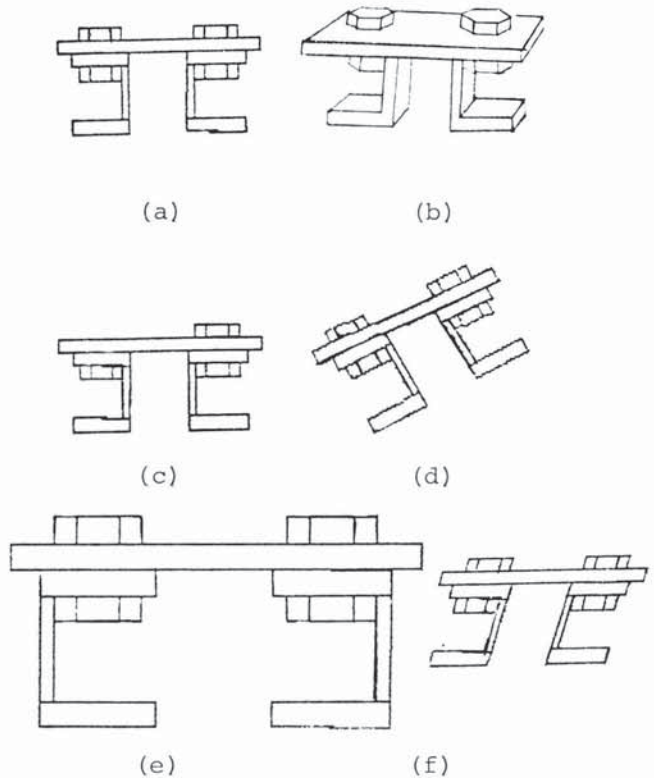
(a) Orthogonal view of picture created in the example, (b) perspective view of the same, (c) deletion of a partinstance, (d) rotation of an assembly (e) scaling of an assembly and (f) shearing of an assembly.
